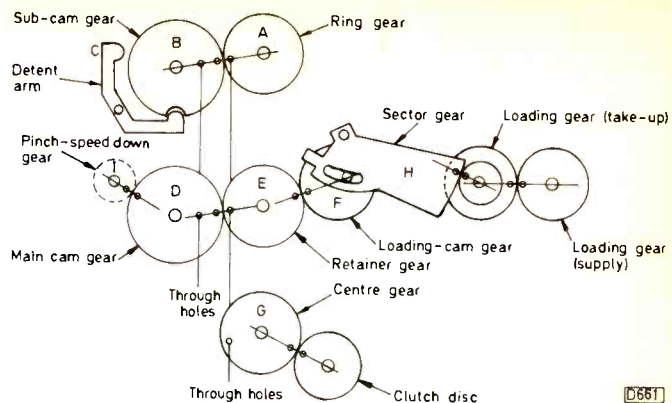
Assembly/alignment order for the gears on the underside of the mechanism.
